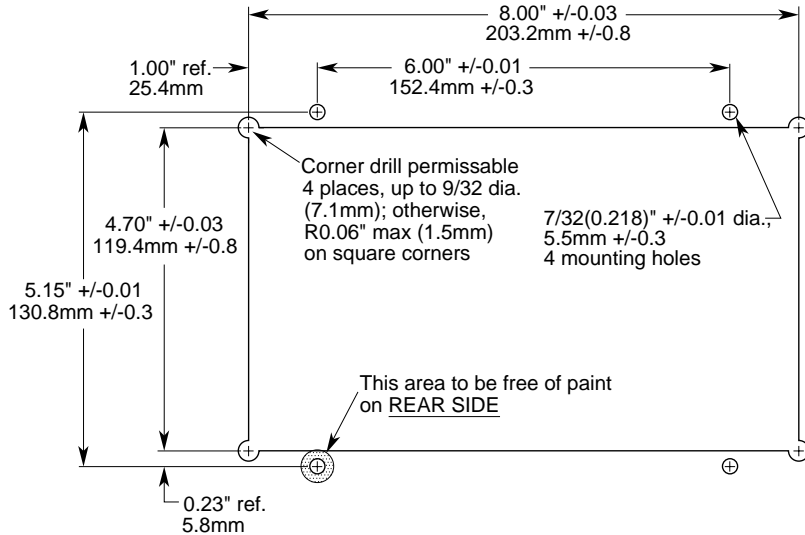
OIT3200/3250 Panel Cutout Dimensions-Front View
